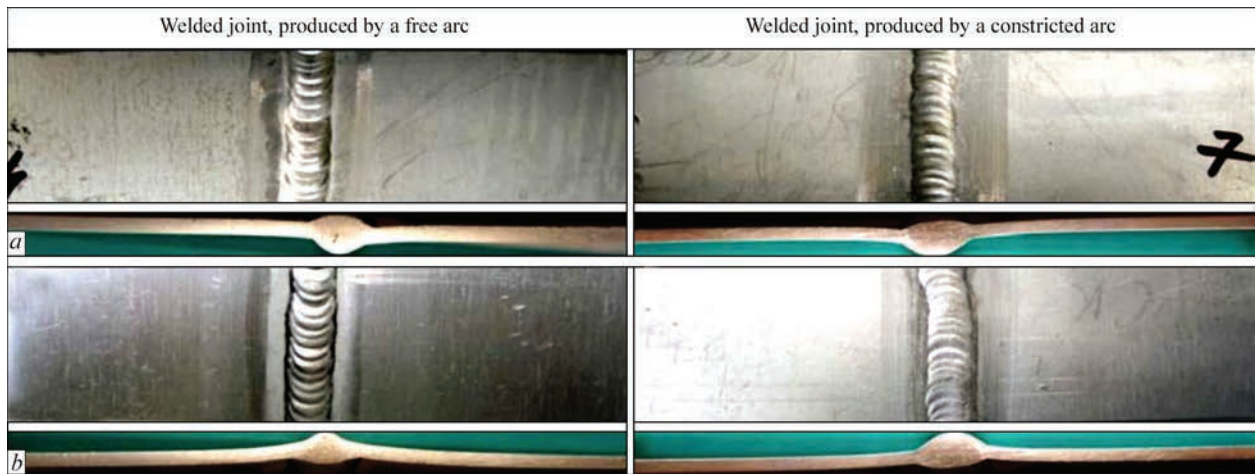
Appearance of working surfaces of specimens of welded joints of B1341T alloy in the state after welding before (a) and after (b) studies of resistance to exfoliating corrosion ($\times 5$)
